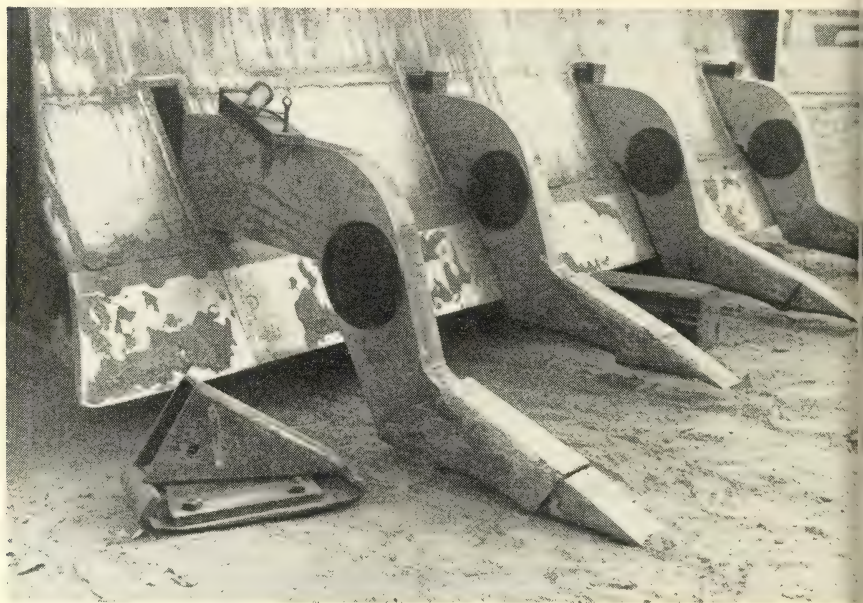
Tooth shank installation, digging points, brush shoe, and method of installation in a bulldozer.
